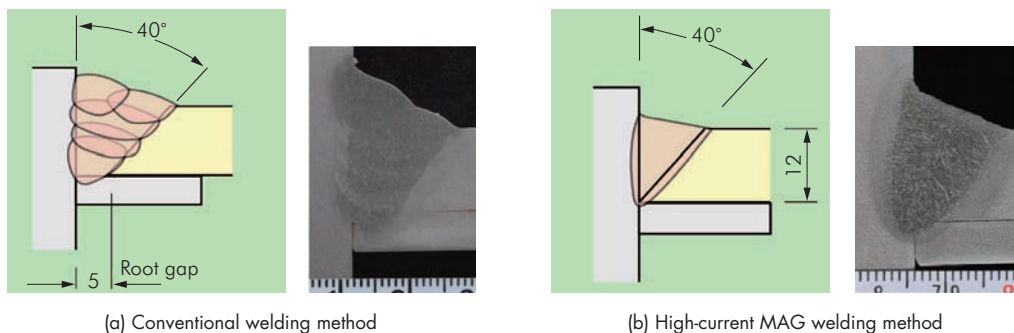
Joint geometry and cross-sectional photo for high-current MAG welding process and conventional welding process
